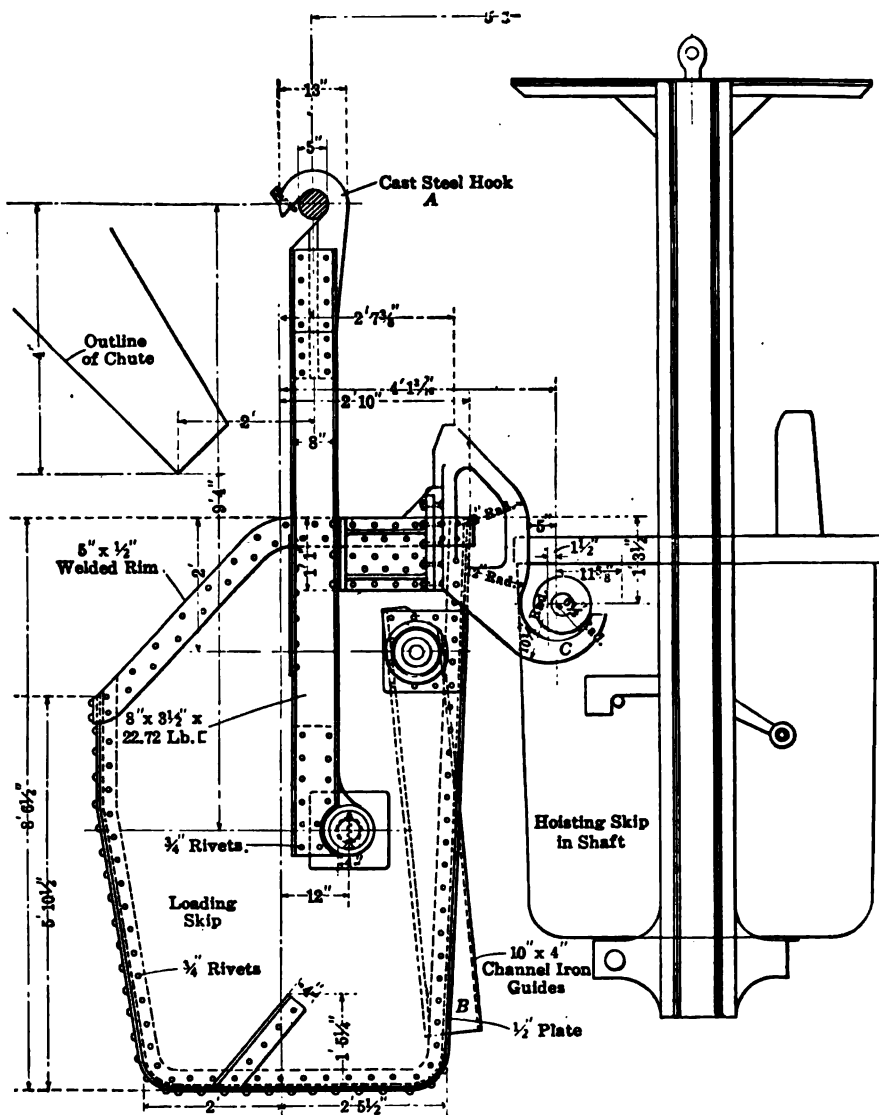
THE WHITFORD MILLS SKIP-LOADING DEVICE.
